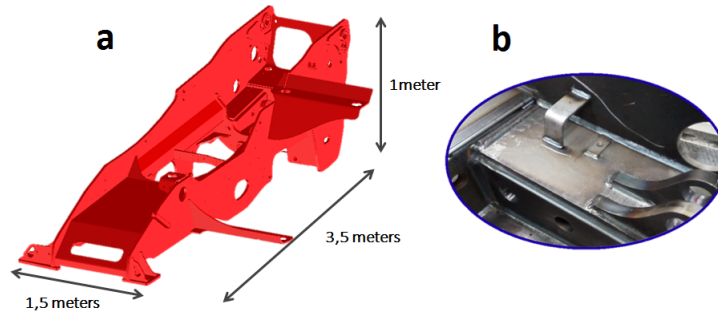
(a) a Manitou chassis with classical dimensions, (b) typical welded assembly
